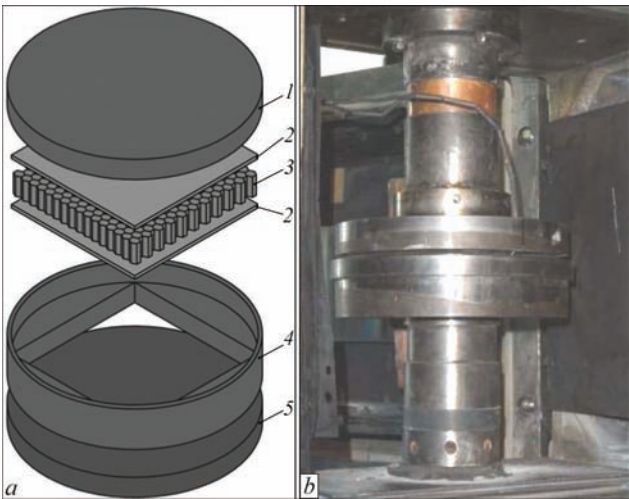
Schematic of fixture for welding three-layer honeycomb panels (*a*) and working chamber with the fixture mounted in it (*b*): 1 — upper flange; 2 — skin; 3 — honeycomb; 4 — limiting sleeve; 5 — lower flange
